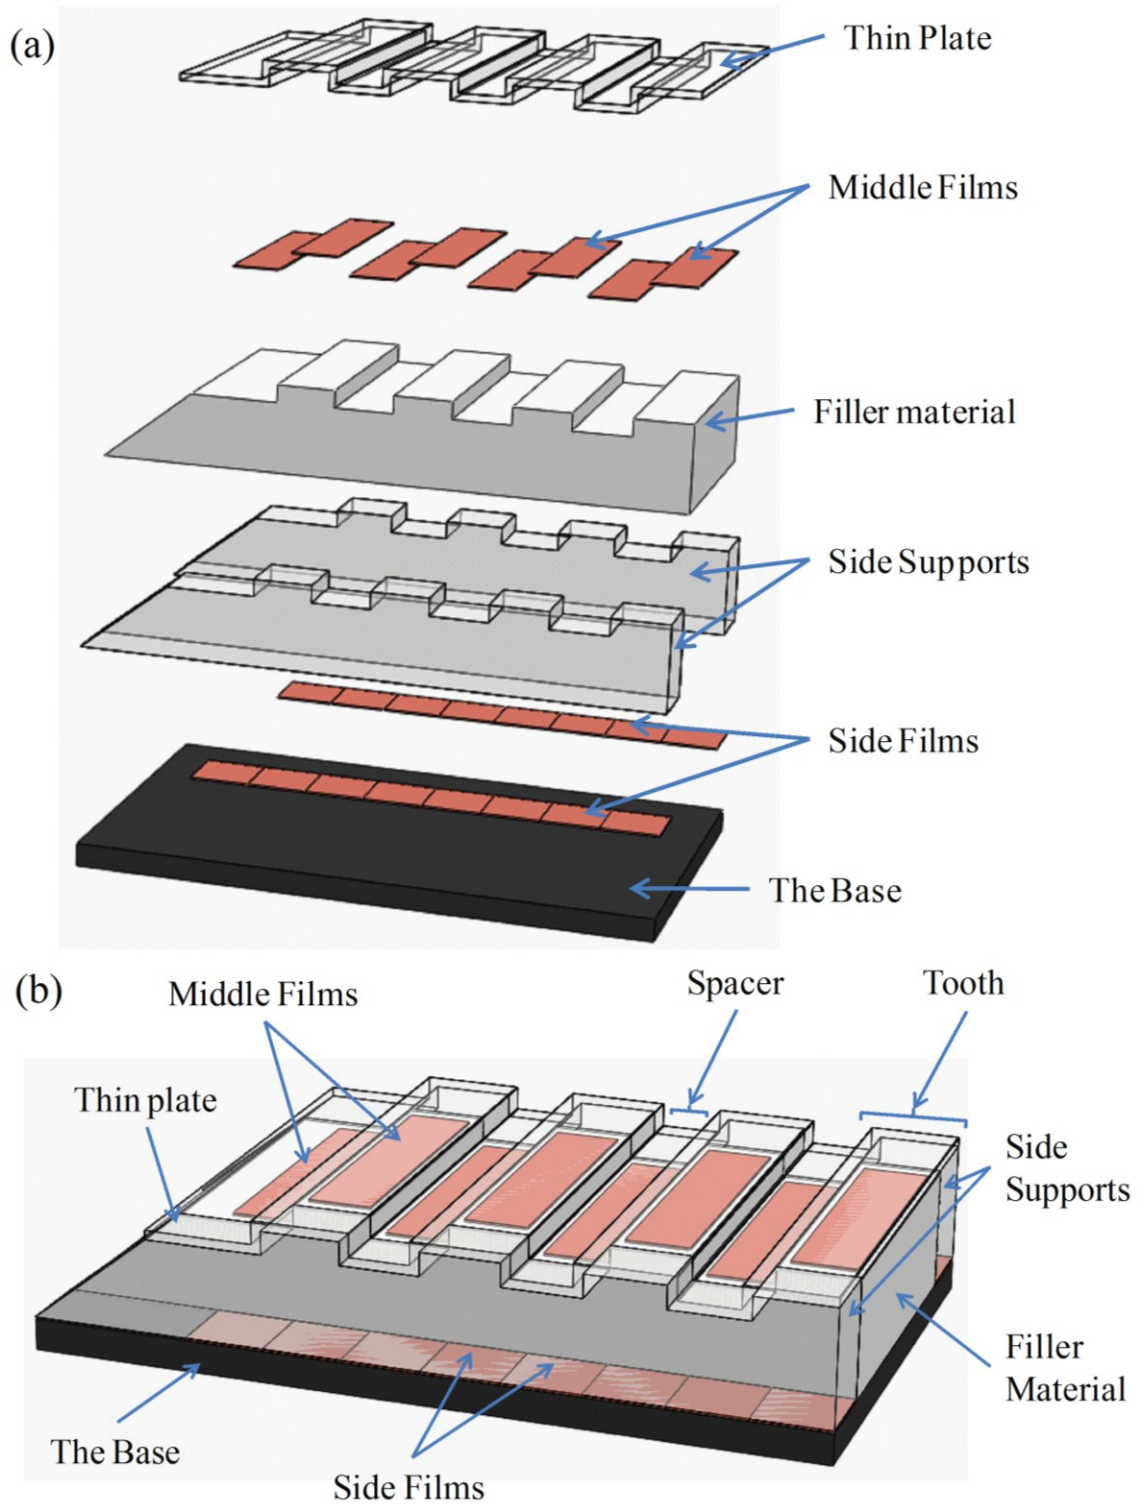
The proposed sensor integrated with an endoscopic grasper jaw, (a) 3D exploded view of the jaw components. (b) 3D isometric view of the jaw.
